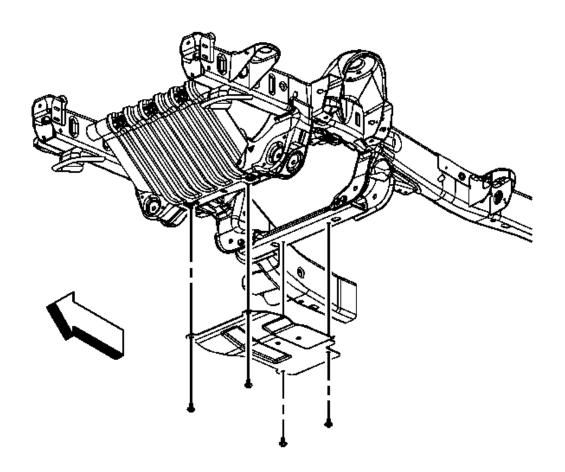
View Of Oil Pan Skid Plate & Bolts
